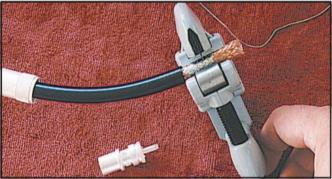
The tubing cutter makes removing the shield and center insulator quick and easy. Do not cut into the center conductor.
